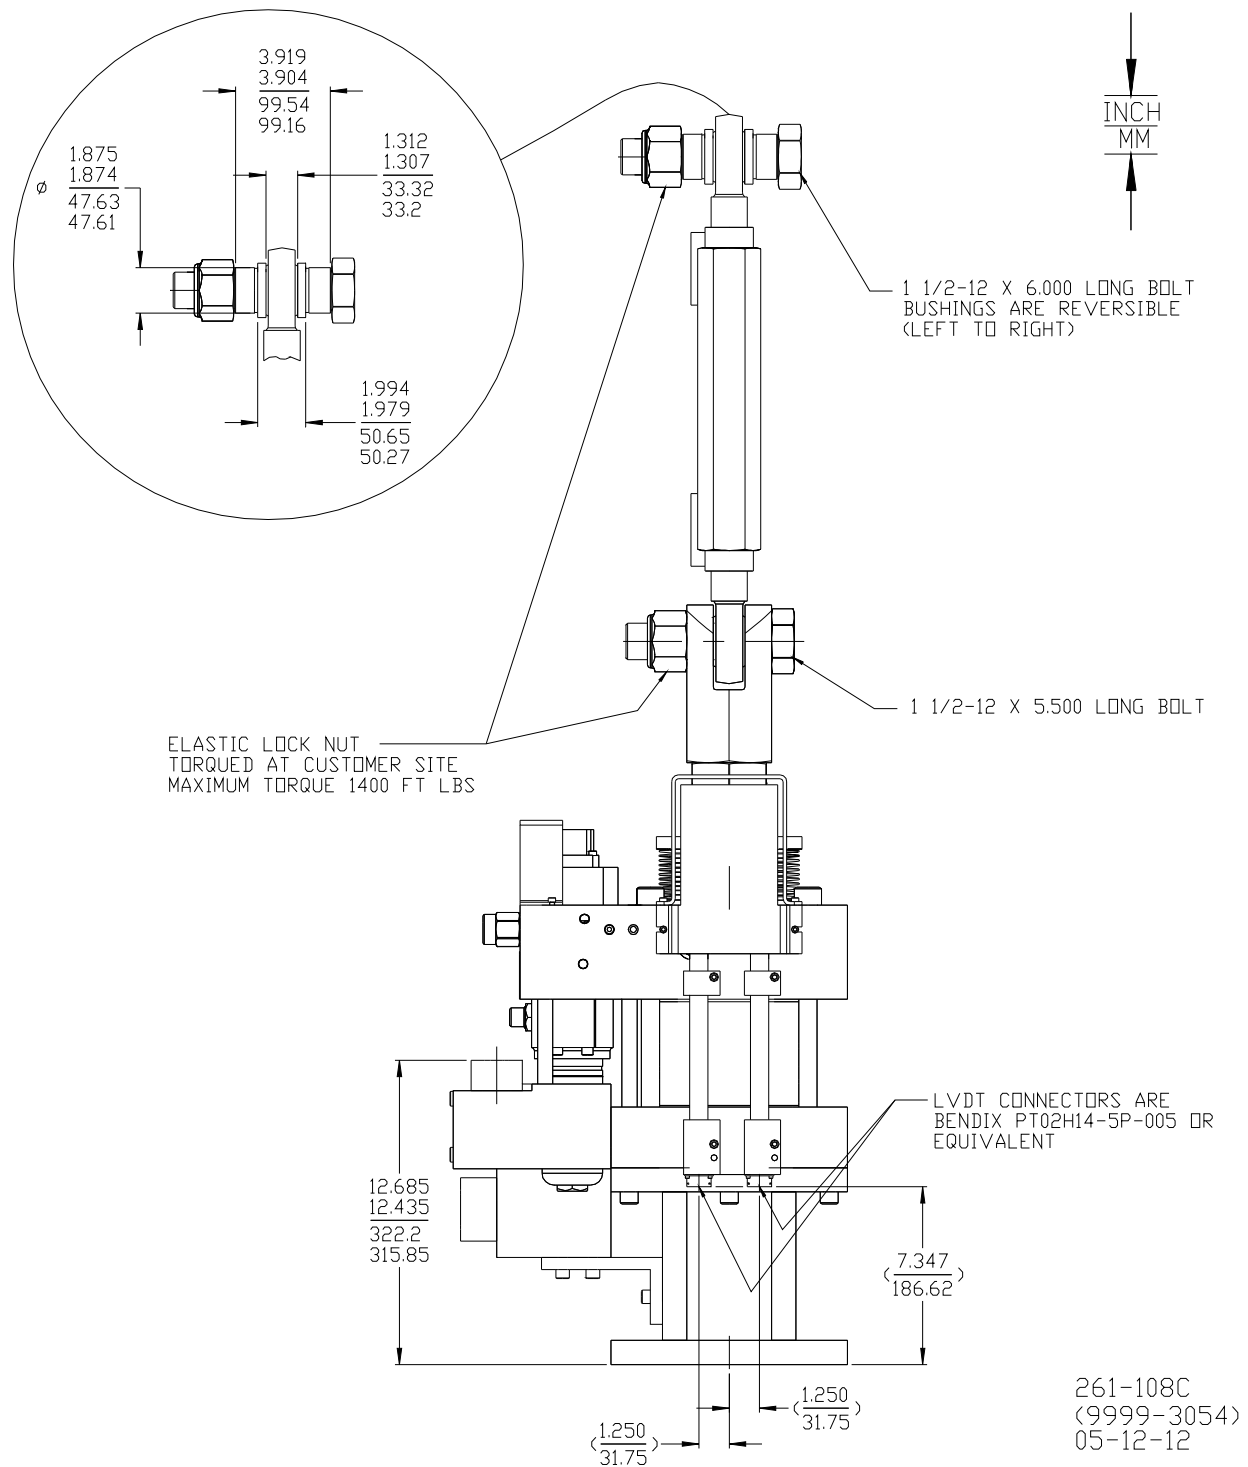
7E IGV Actuator with Hydraulic Trip (right side view)
